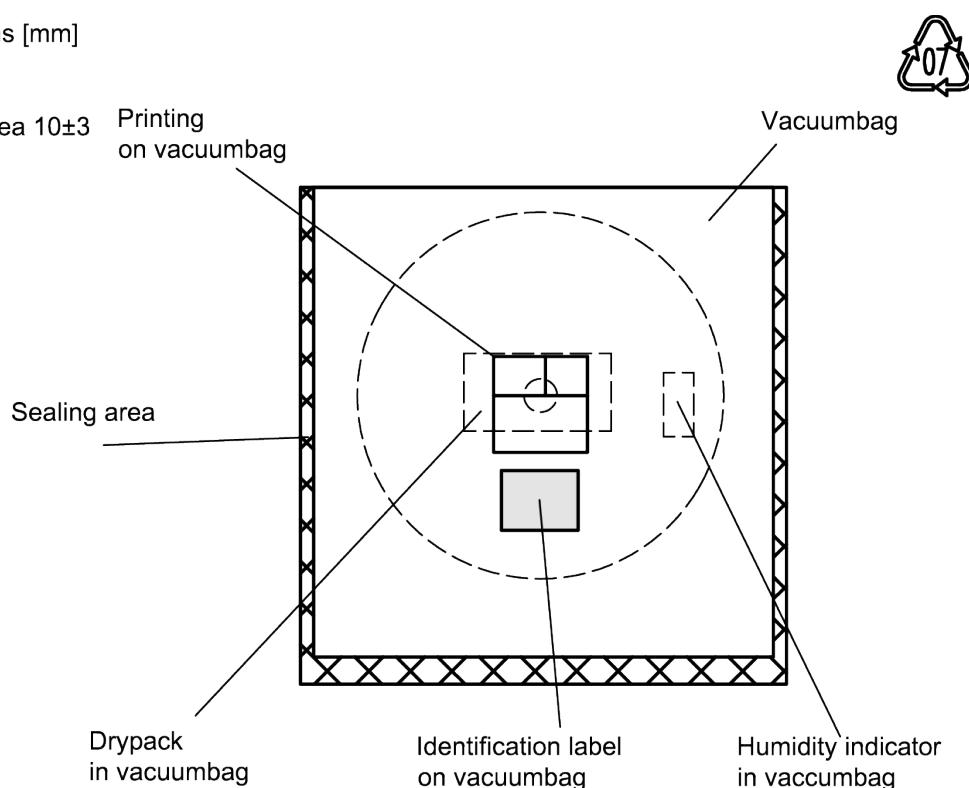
Drawing of moisture barrier bag (MBB) for reel with diameter of 330 mm.
